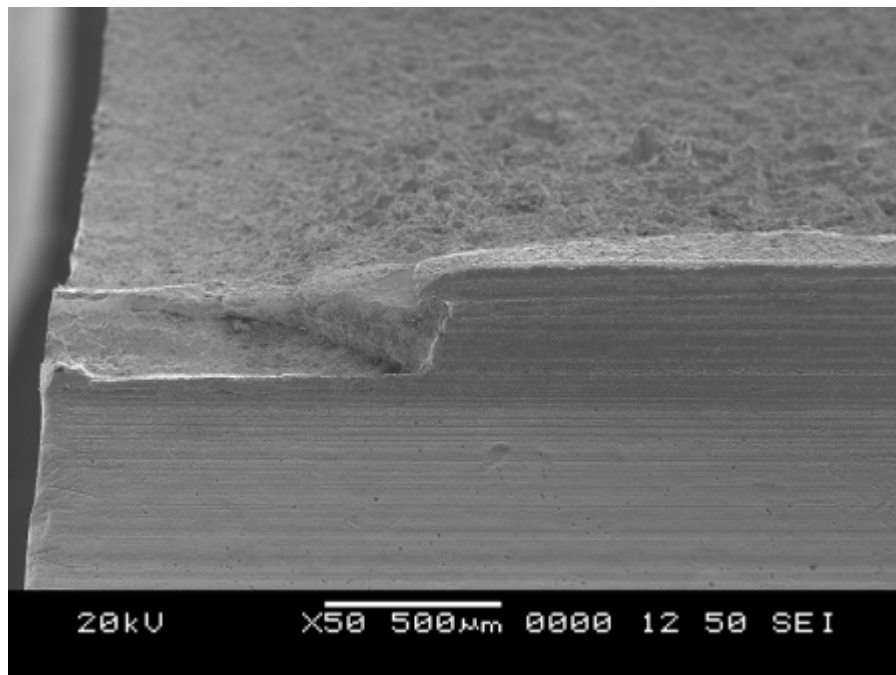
Tooth 29 root, gear half, coast side tool marks.
